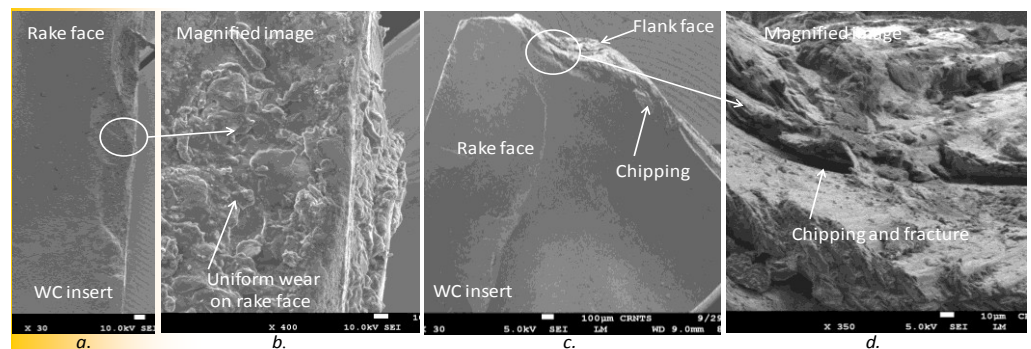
a-d* Influence of machining environment on tool wear mechanism [6]
